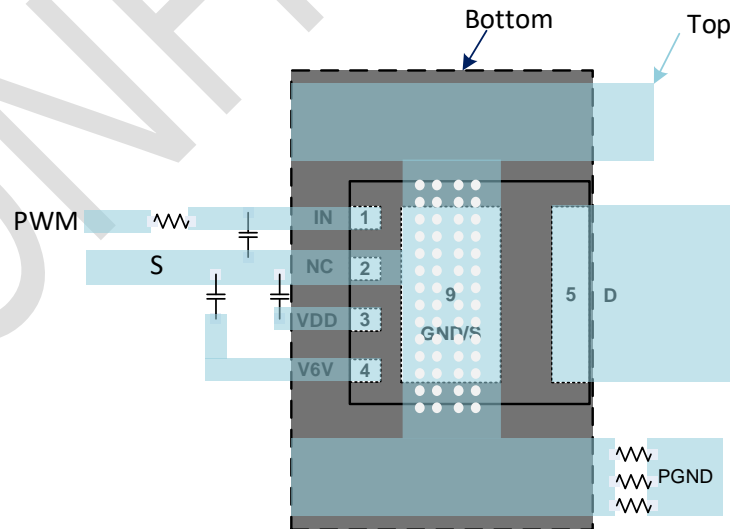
GBP65200G PCB Layout Example with sensing resistor
